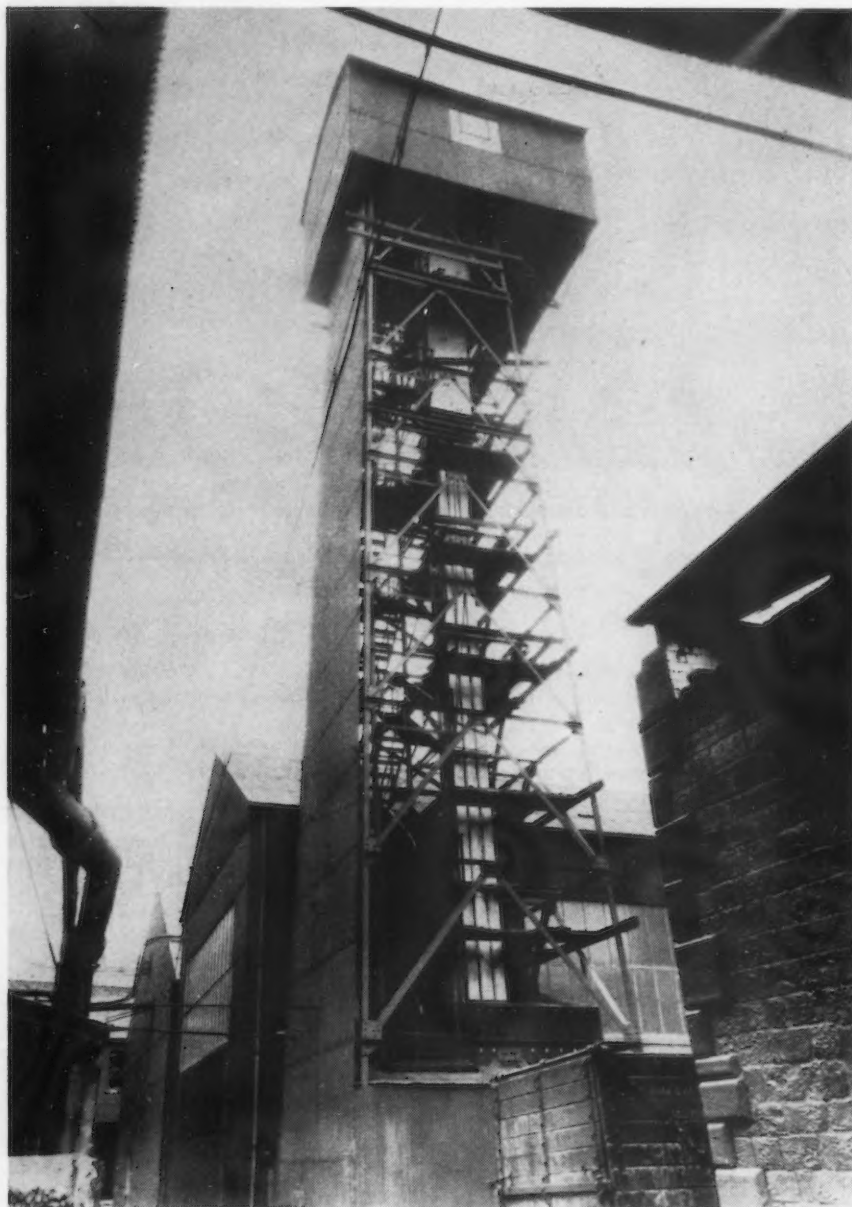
A Siemens-Schukert tower furnace used for bright annealing strip.
